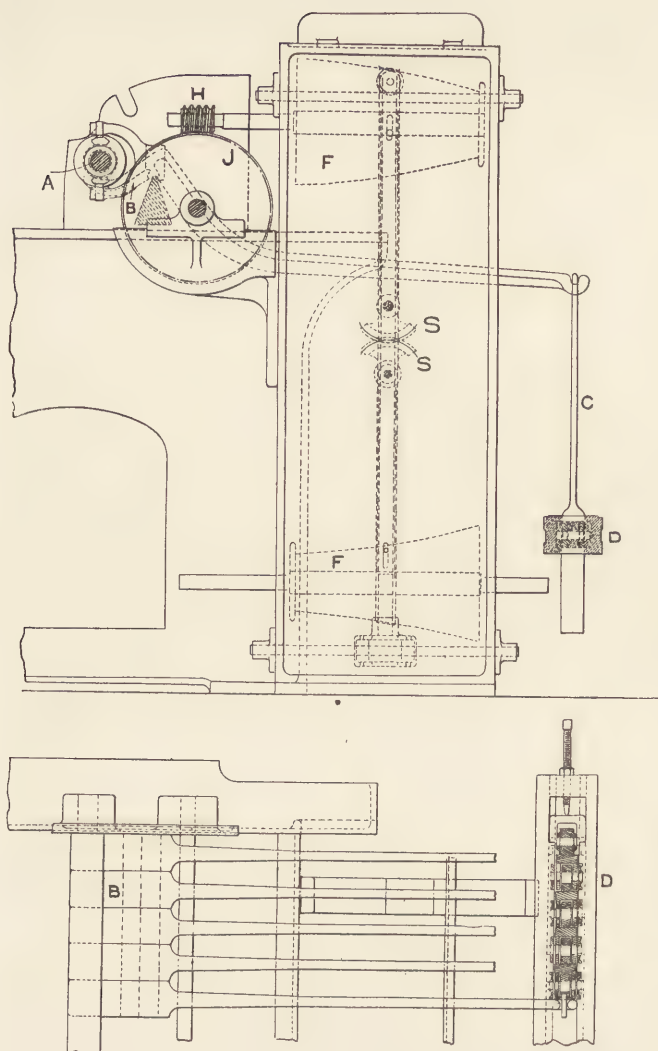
ELEVATION OF CONE BOX AND PLAN OF PEDALS AND BOWL BOX.
